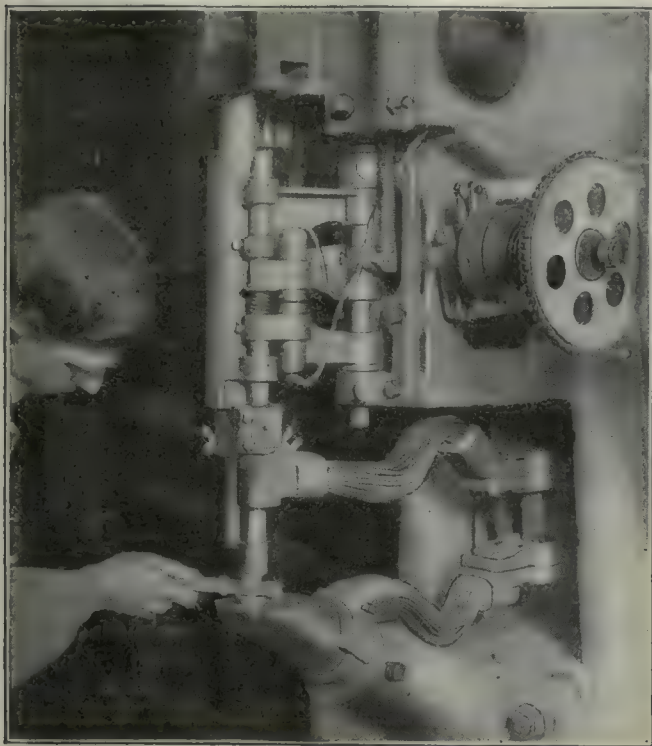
HEATING RIVET IN KOBERT MACHINE
